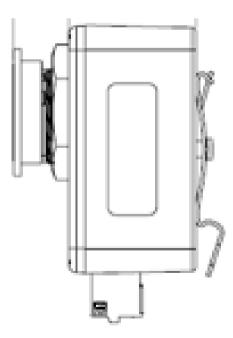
Remote Pendant Patch Board Mk2 DIN rail mount
